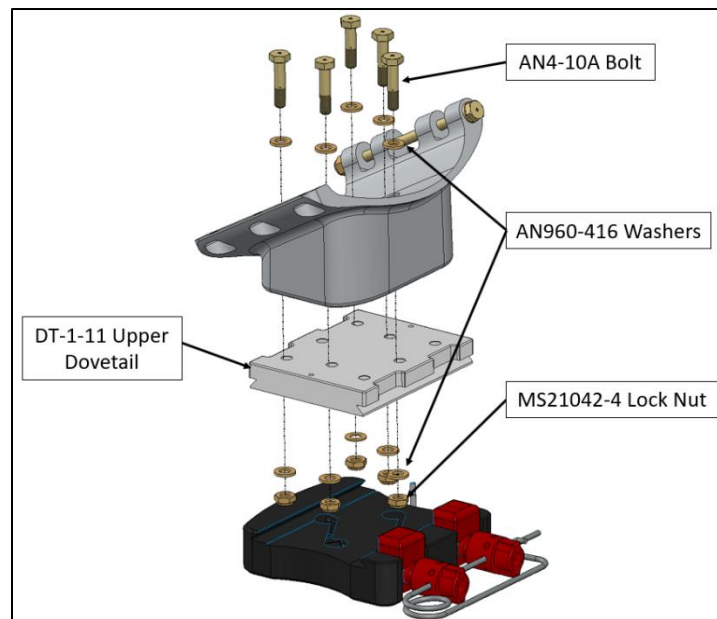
Exploded view of DT-1-1 Installation onto the AFWM Lower Clamp
